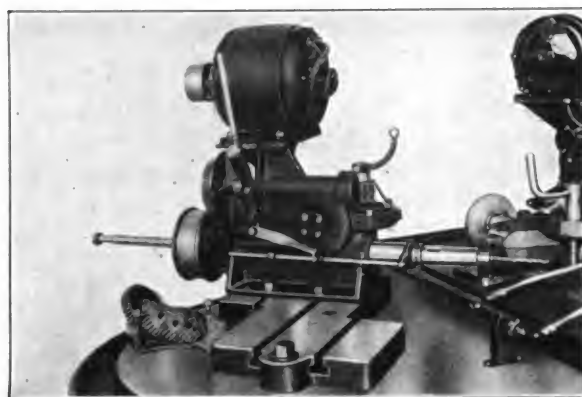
One of the drilling heads of the Harrington Crankshaft Driller
